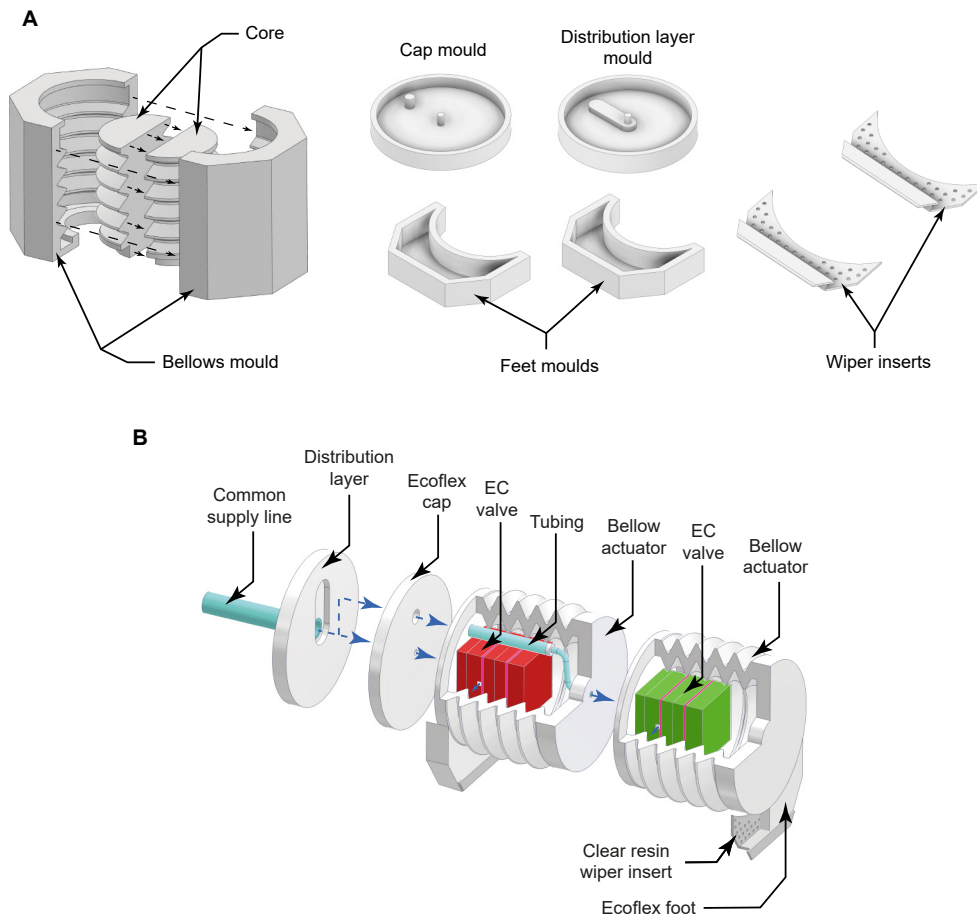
Manufacturing of the soft crawler. (A) Moulds necessary for the manufacturing of the robot. The bellows actuator moulds are printed in four separate pieces for ease of printing and demoulding. (B) Detailed view of the assembled robot.
